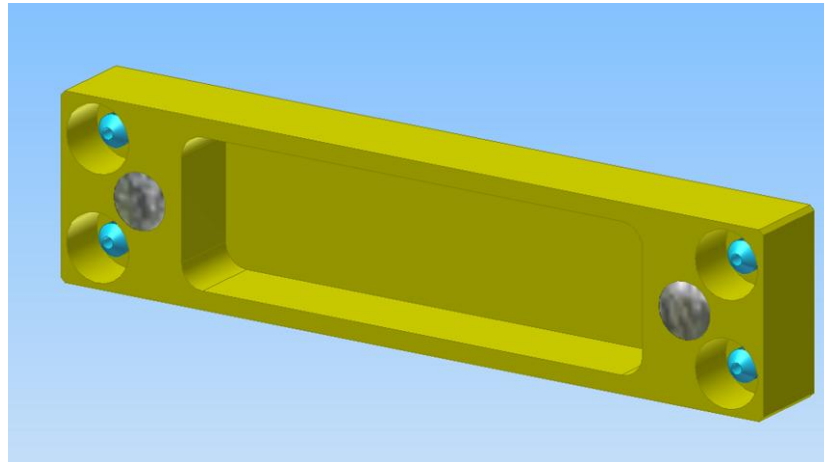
Close up of the drill jig. On the face that is in contact with the rotator structure the 2 magnets (grey) and the drilled bolts (cyan) are visible. The circular holes around the bolts can be filled with putty to catch the chips.
